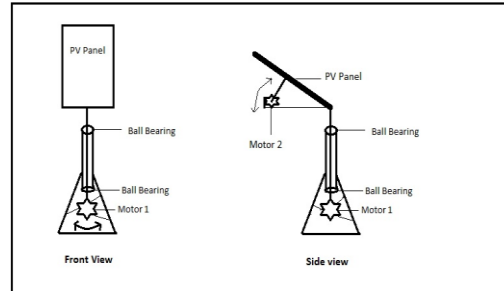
Showing Front view and Side view of the Double Axis Solar tracker
